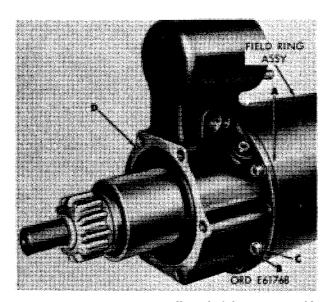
Removing or installing shaft housing assembly attaching parts.
